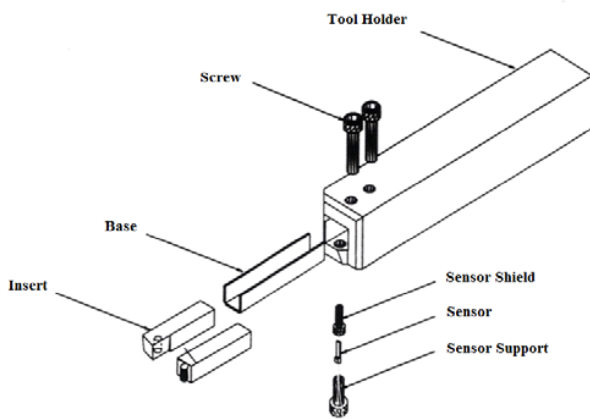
Exploded view of tool and tool holder with sensor accessories
